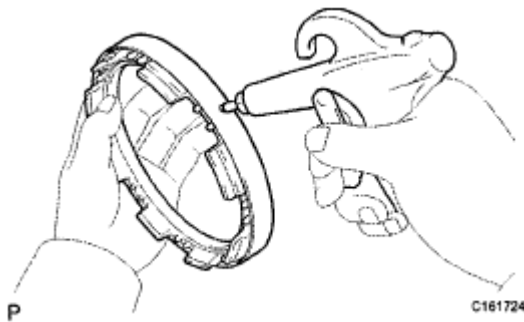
Applying Compressed Air To No. 1 Brake Cylinder
